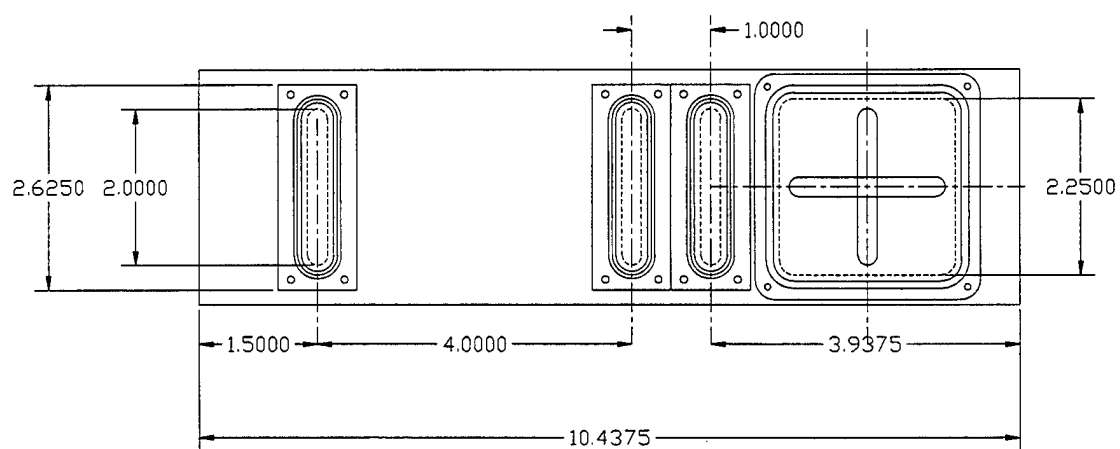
Wind tunnel floor with probe access (dimensions in inches).
